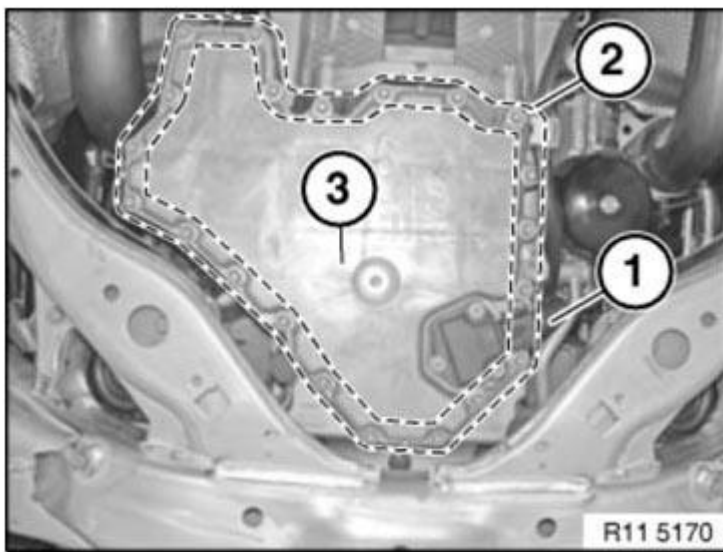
Identifying Plug Connection On Oil Level Sensor And Lower Oil Sump Section
